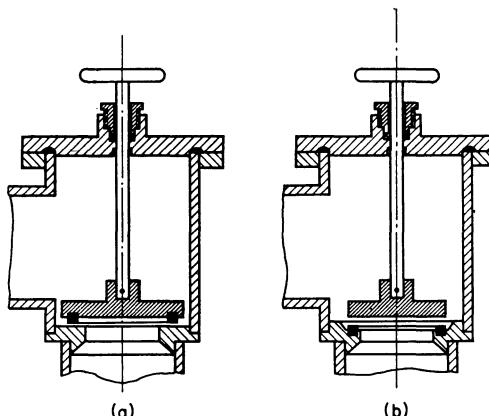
Stem operated plate valves, having a single closing system: (a) with gasket on the plate; (b) with gasket on the seat
